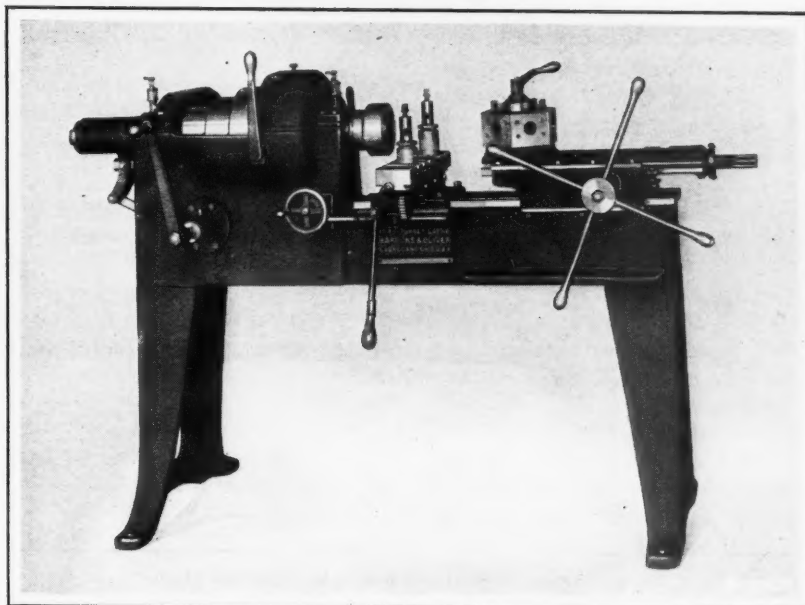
Bardons & Oliver Turret Lathe intended for machining Brass, Iron, and Aluminum
